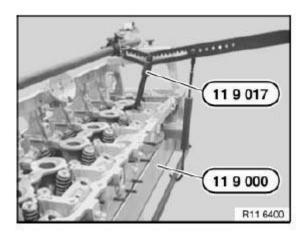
Pressing Down Inlet Valves Using Special Tool (11 9 017) Courtesy of BMW OF NORTH AMERICA, INC.
